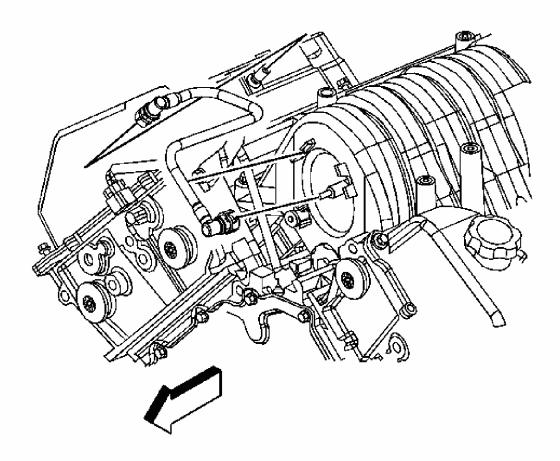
Identifying PCV Foul Air Tube Quick Connect Fitting Courtesy of GENERAL MOTORS CORP.
